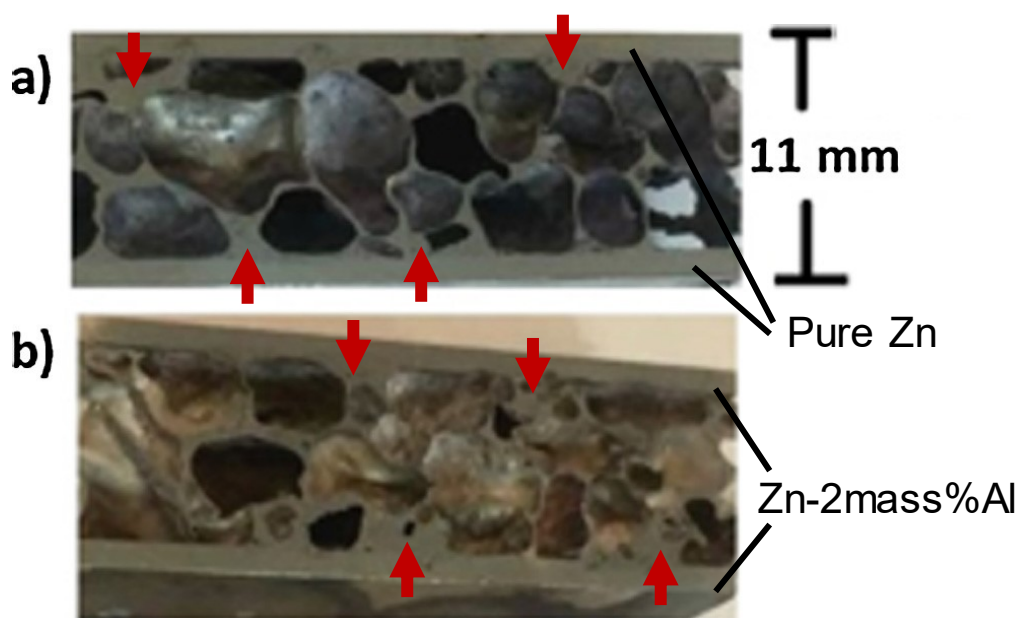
Macrograph of cross-section of aluminum foam sandwich: (a) brazed using pure Zn, (b) brazed using Zn-2mass%Al sheet [54]. Red arrows indicate filled pore.
